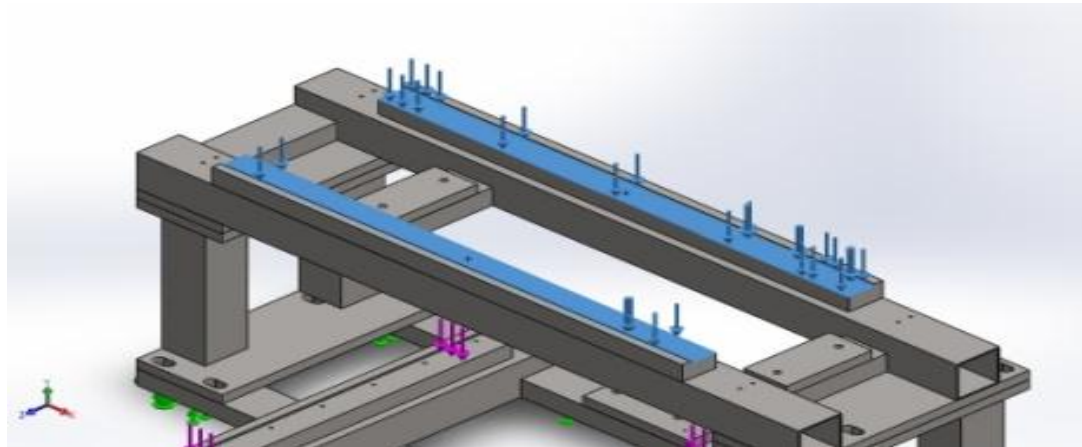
Force applying on X axis of PCB Drill Mech SS 300 Structure
